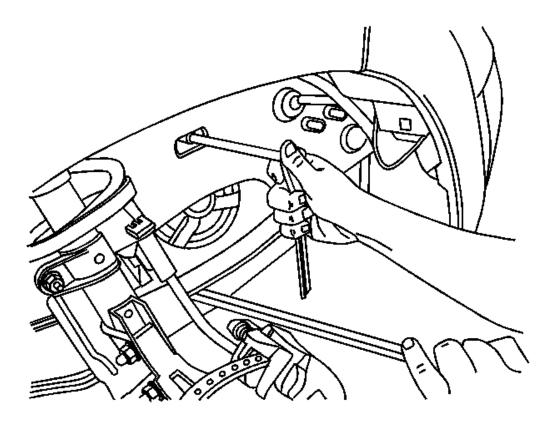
J 44811 Installed To Drive Belt Tensioner Courtesy of GENERAL MOTORS CORP.
